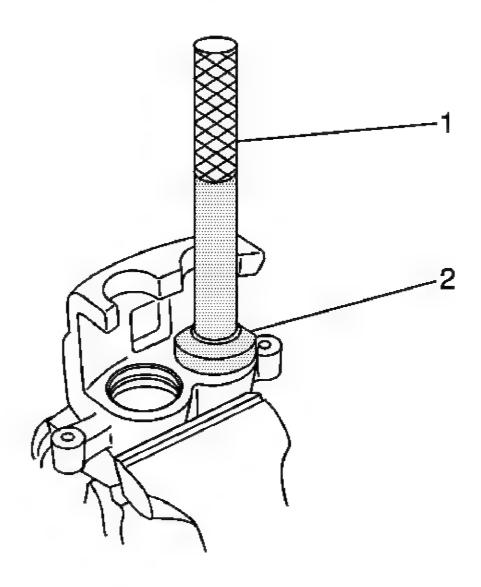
Installing Piston Dust Seal Courtesy of GENERAL MOTORS CORP.
